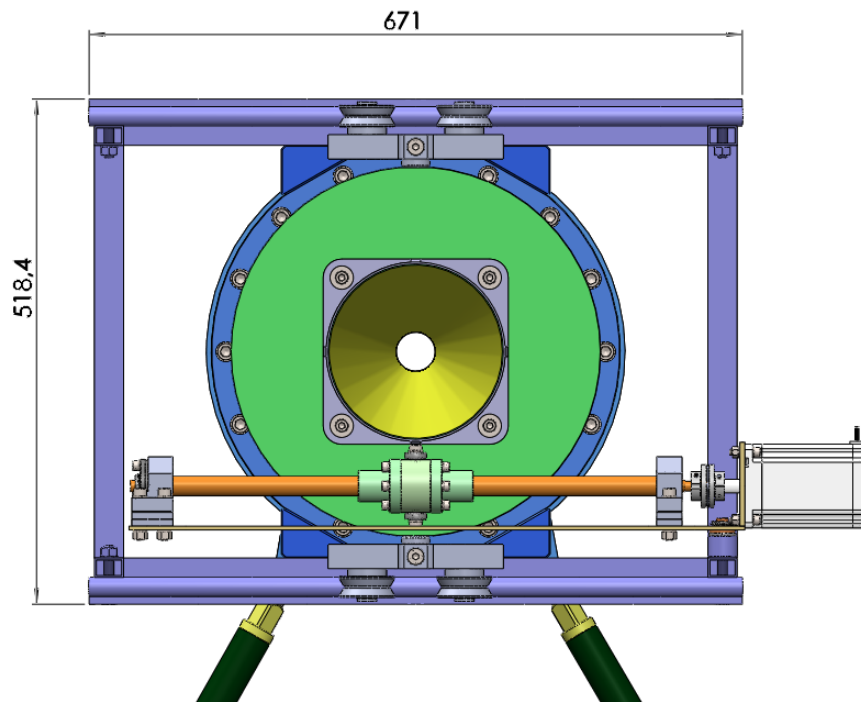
Front view of bellows weldment and kinematic mechanism with highlighted dimensions of total height and width of assembly
